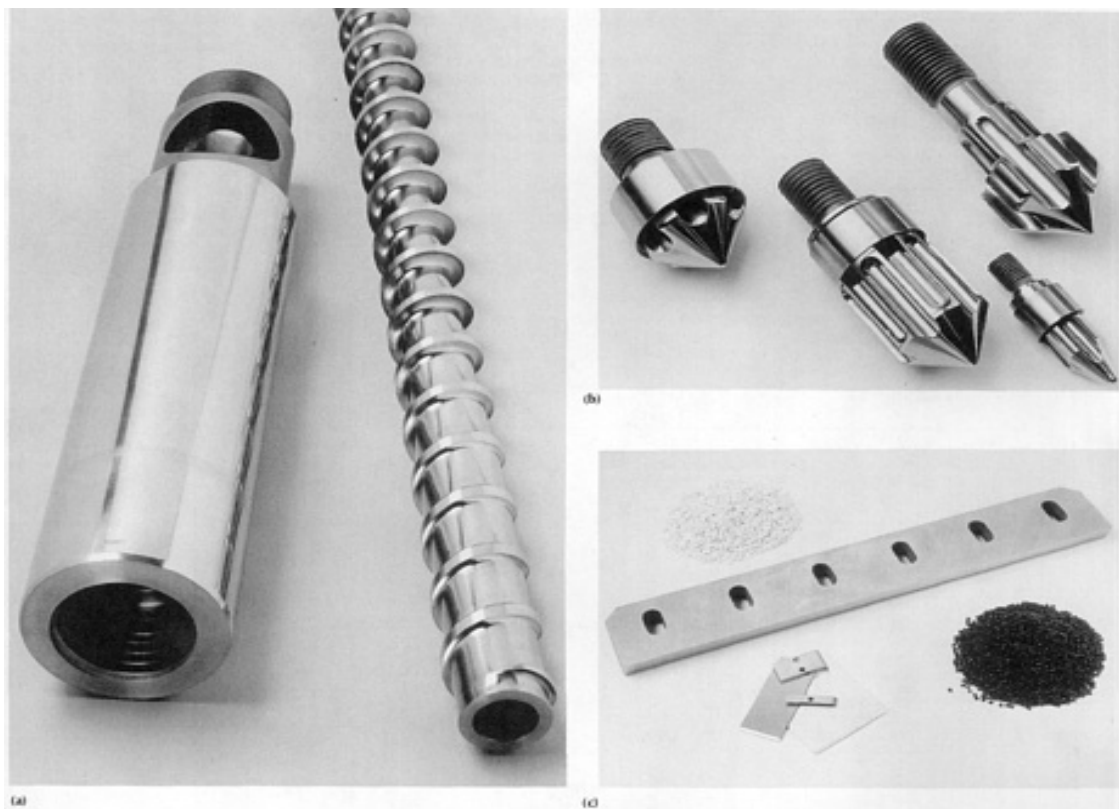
Plastics processing equipment components. (a) Barrels and screws. (b) Nonreturn check ring valves. (c) Granulator and pelletizer knives
